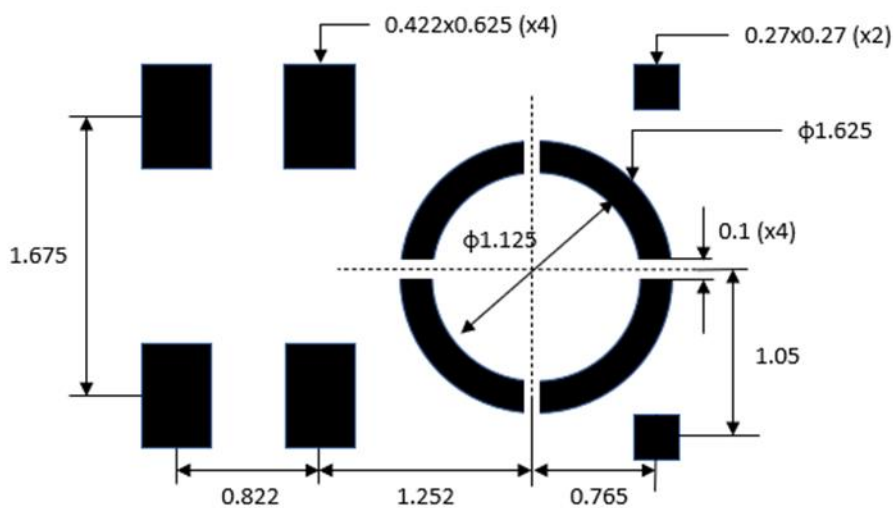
Suggested Solder Paste Stencil Pattern Layout
